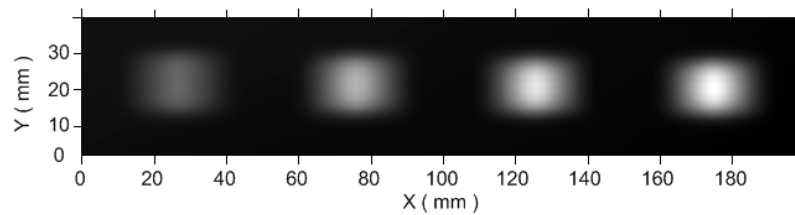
Capacitive image of the aluminium plate containing flat bottomed holes of depth (from left to right) 2 mm, 4 mm, 6 mm and 8 mm.
